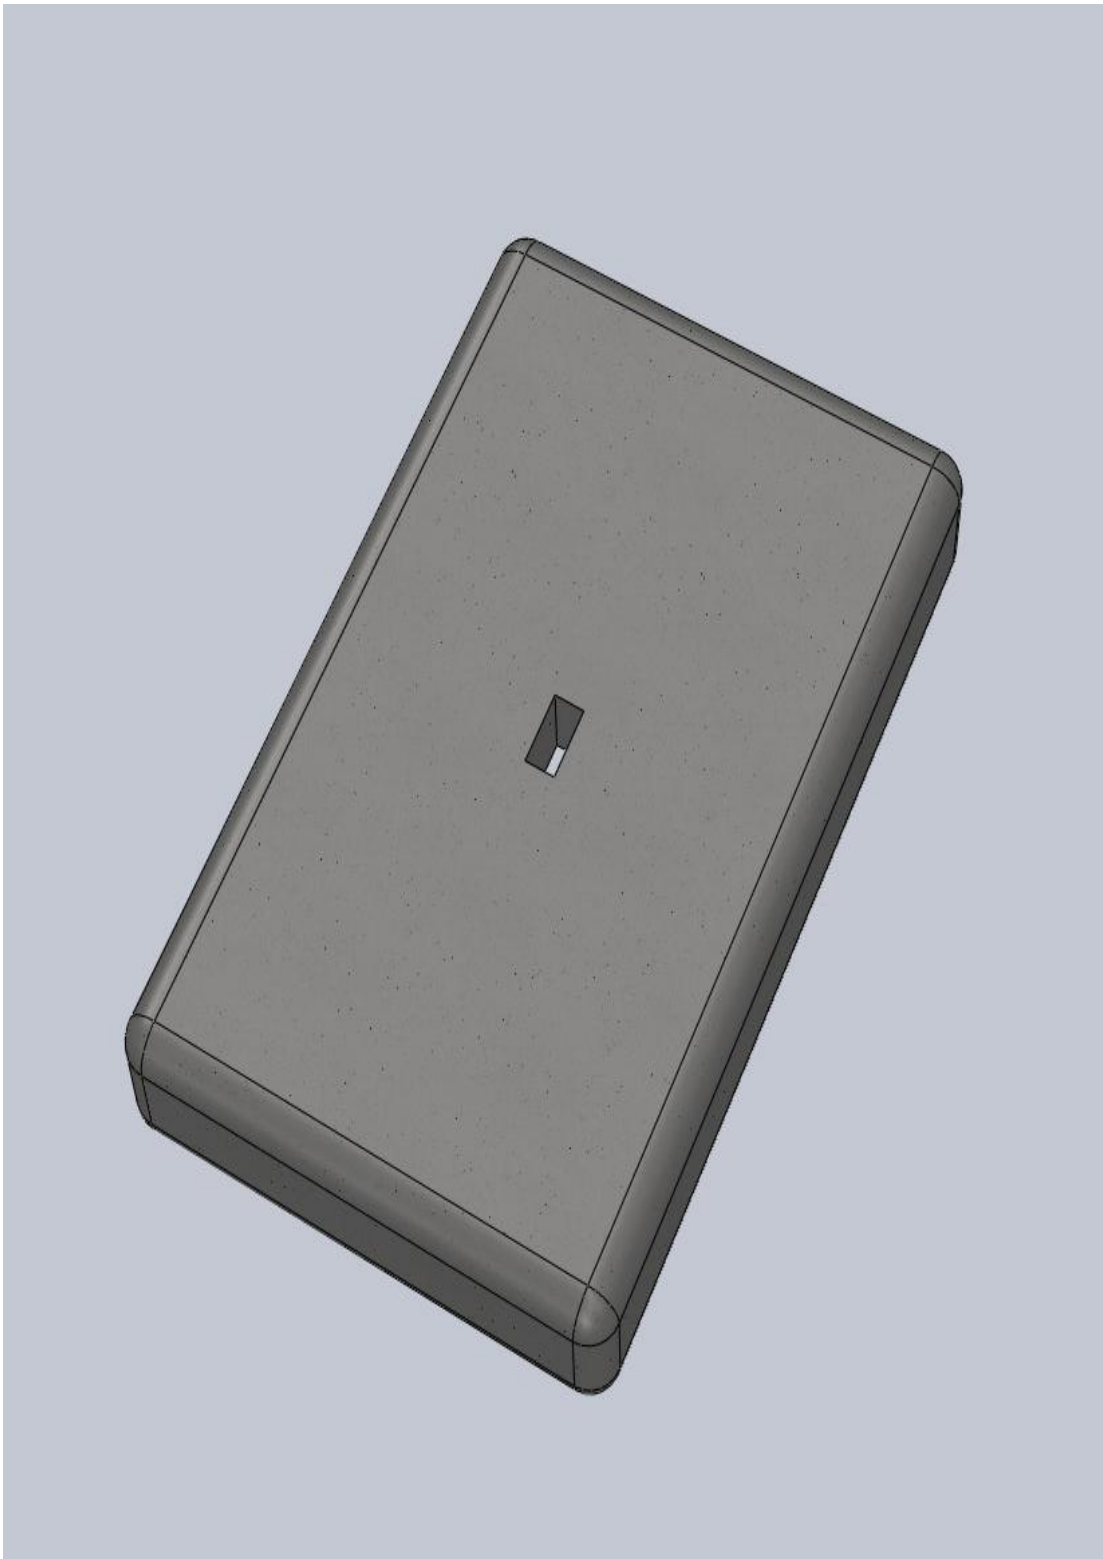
Sketch diagram of bottom part of mold (rear view)
